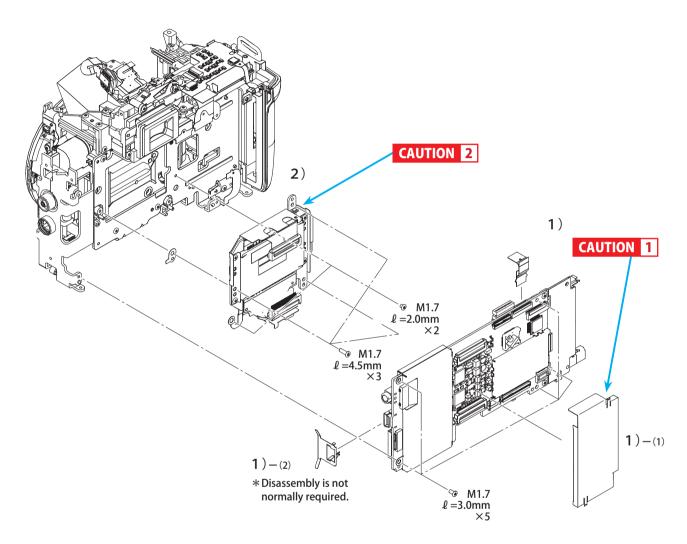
Main PCB Ass'y and CMOS Sensor Ass'y Removal
